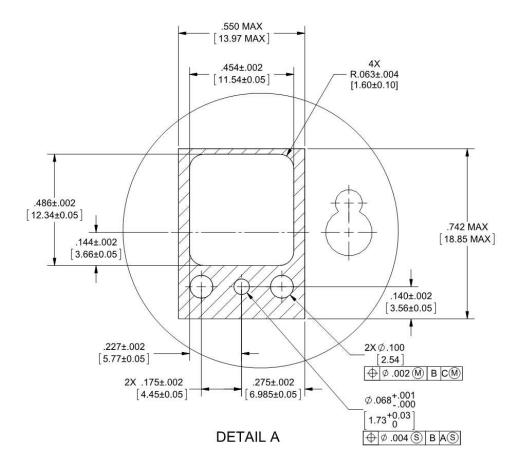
Detail A, Four Position RF Backplane Module Mounting.
